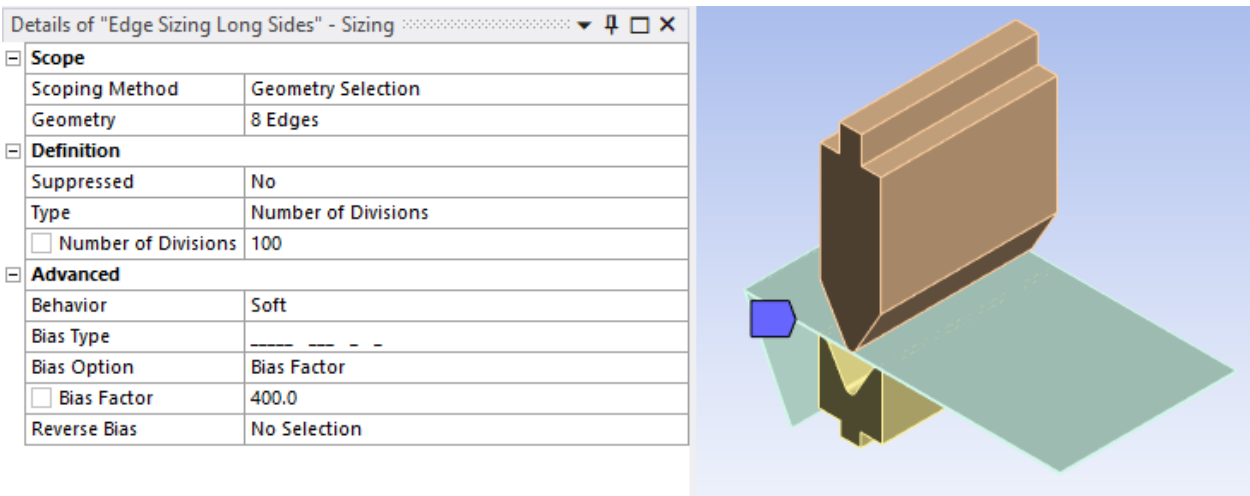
Edge sizing of bent side of sheet (2nd bend)
